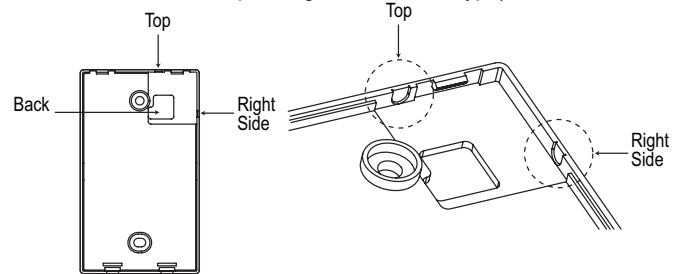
Attaching the Wall Plate (Plate Appearance will Differ Depending on Controller Type).
